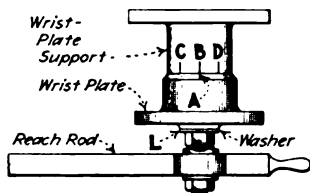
Plan view of Corliss wrist plate showing marks used in setting valves.
